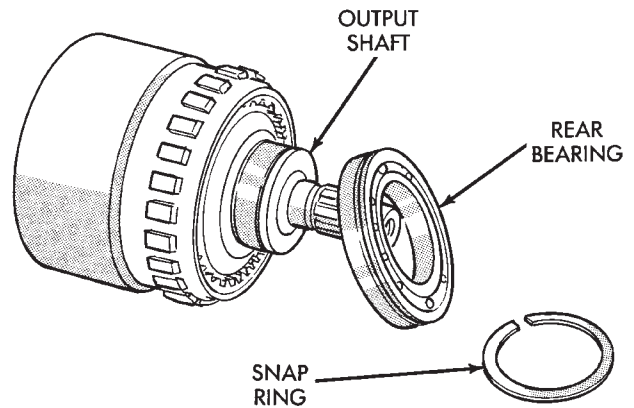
Rear Bearing Snap Ring Removal/Installation
